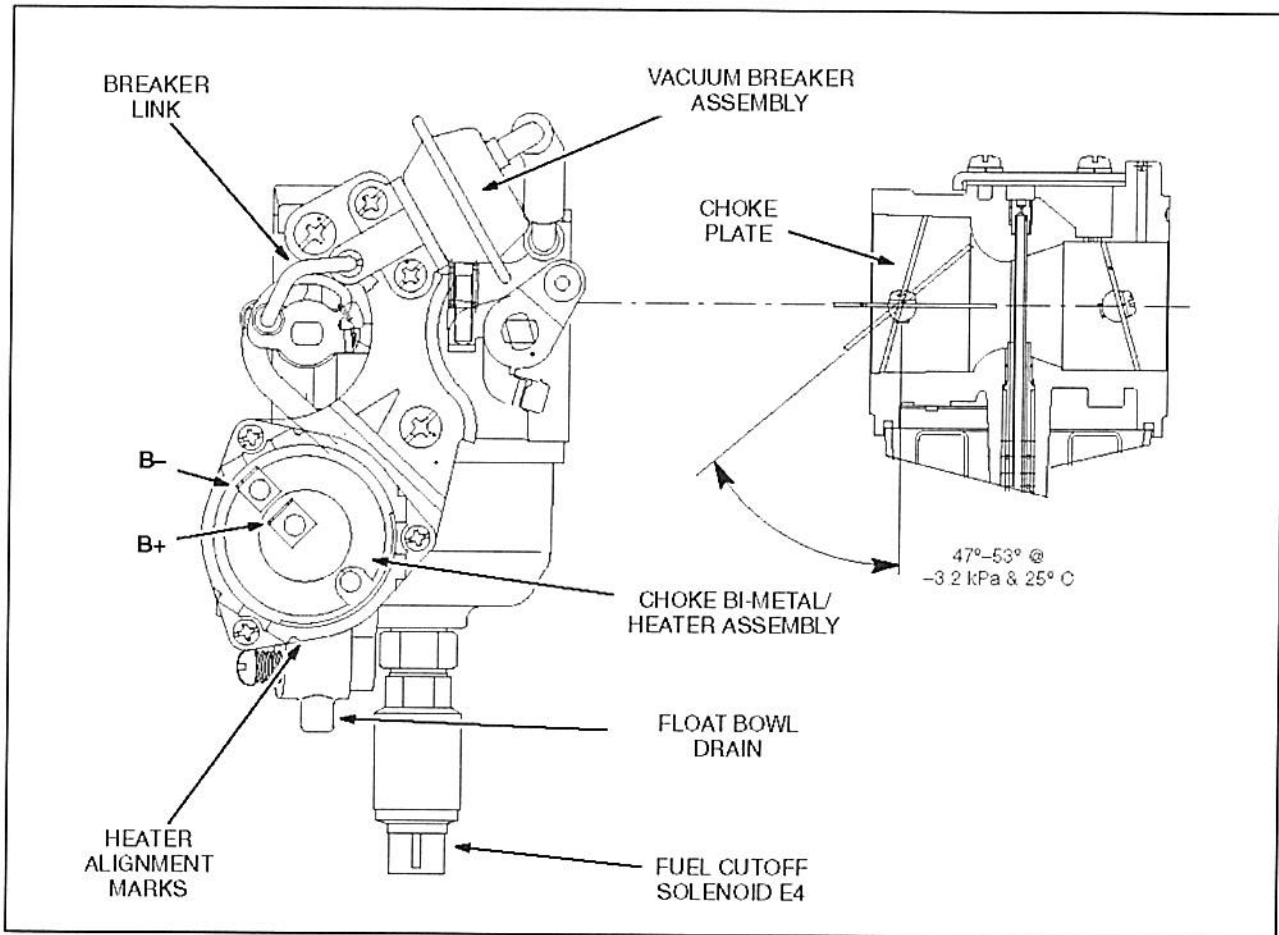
CARBURETOR / CHOKE ASSEMBLY
